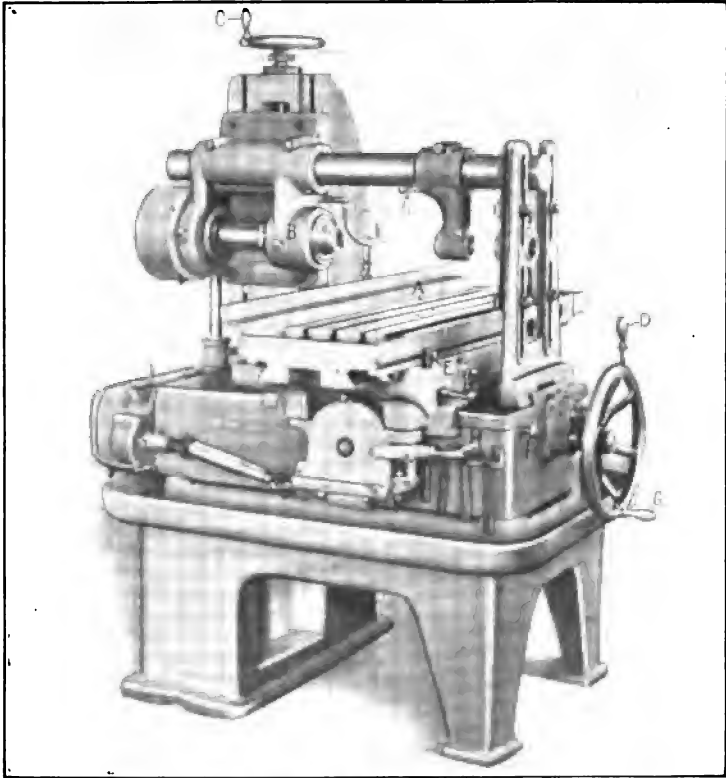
Brown & Sharpe Plain Milling Machine of the Lincoln Type
